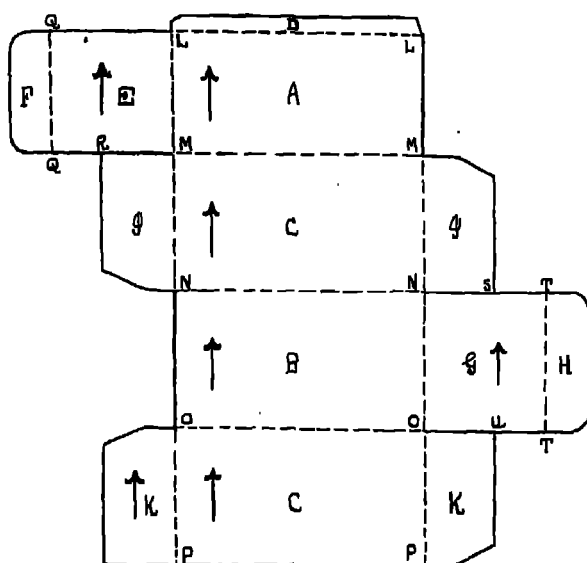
SINGLE-PIECE ELECTRIC LAMP PACKET.
